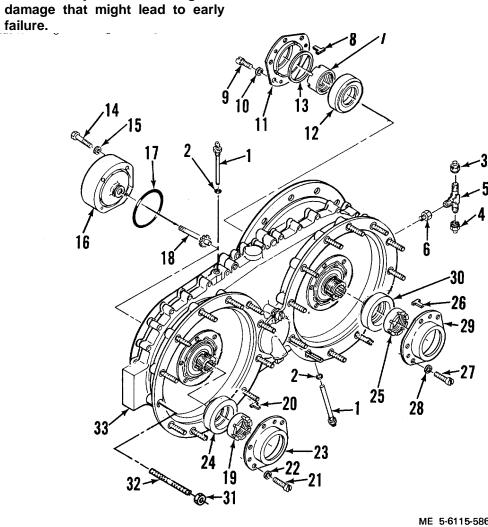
Gas turbine engine assembly. (sheet 1 of 2)
